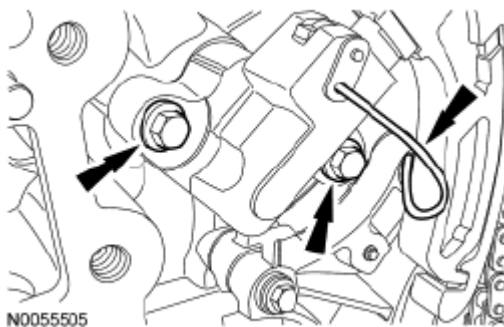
Locating Primary Tensioner Bolts & Lockpin
